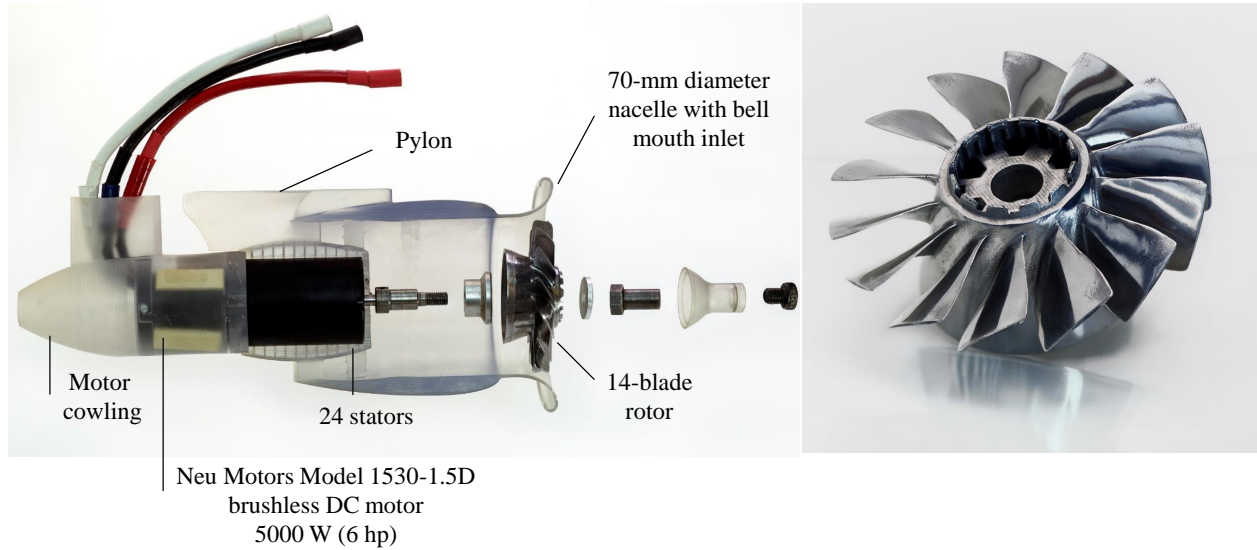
Overview of the ducted fan design. a) cross-sectional view; b) picture of the 3D printed rotor.
